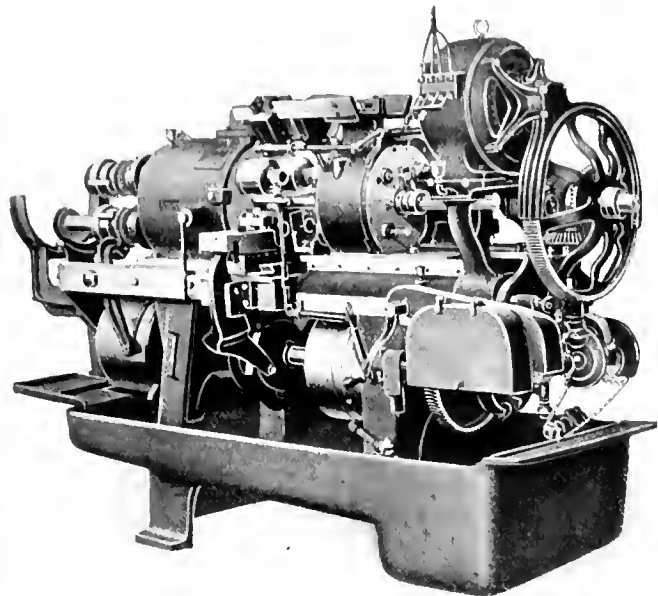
The Acme Automatic Screw Machine arranged for Motor Drive.
